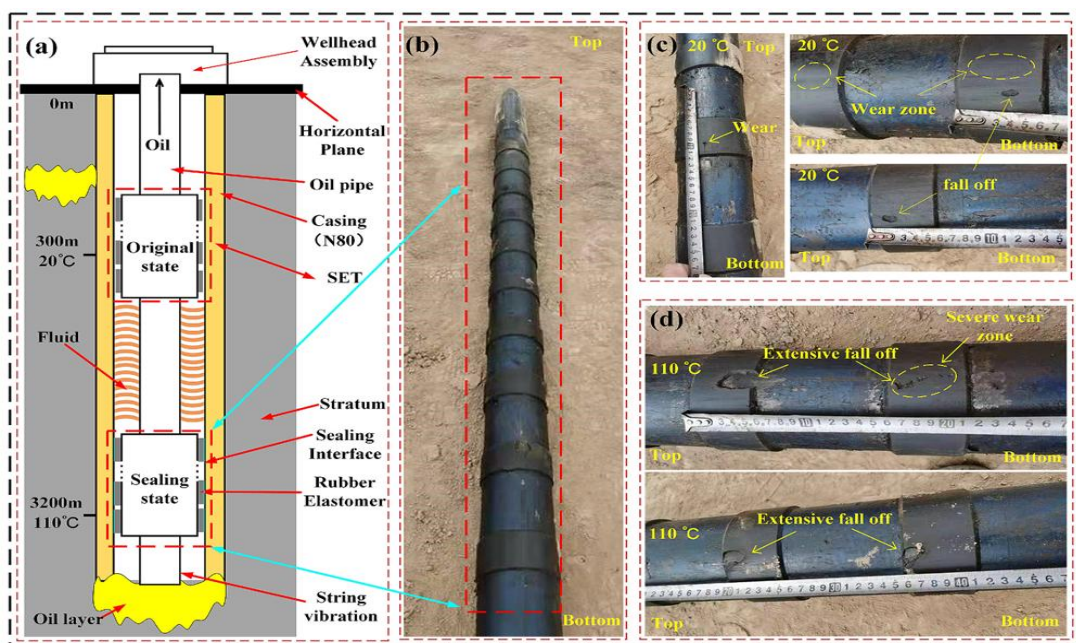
Depicted of sealing & shaft failure of solid expandable tubular (Qiao et al., 2024).
